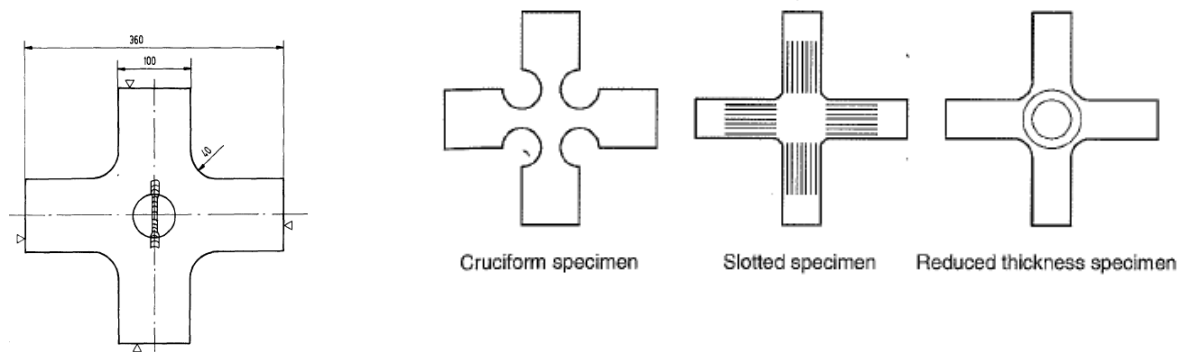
Cruciform specimen for testing of weld (left) [25], and for parent metal (right) [21].
